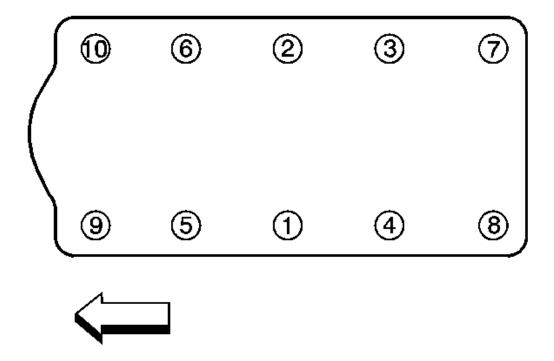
Intake Manifold Bolt Tightening Sequence Courtesy of GENERAL MOTORS CORP.
